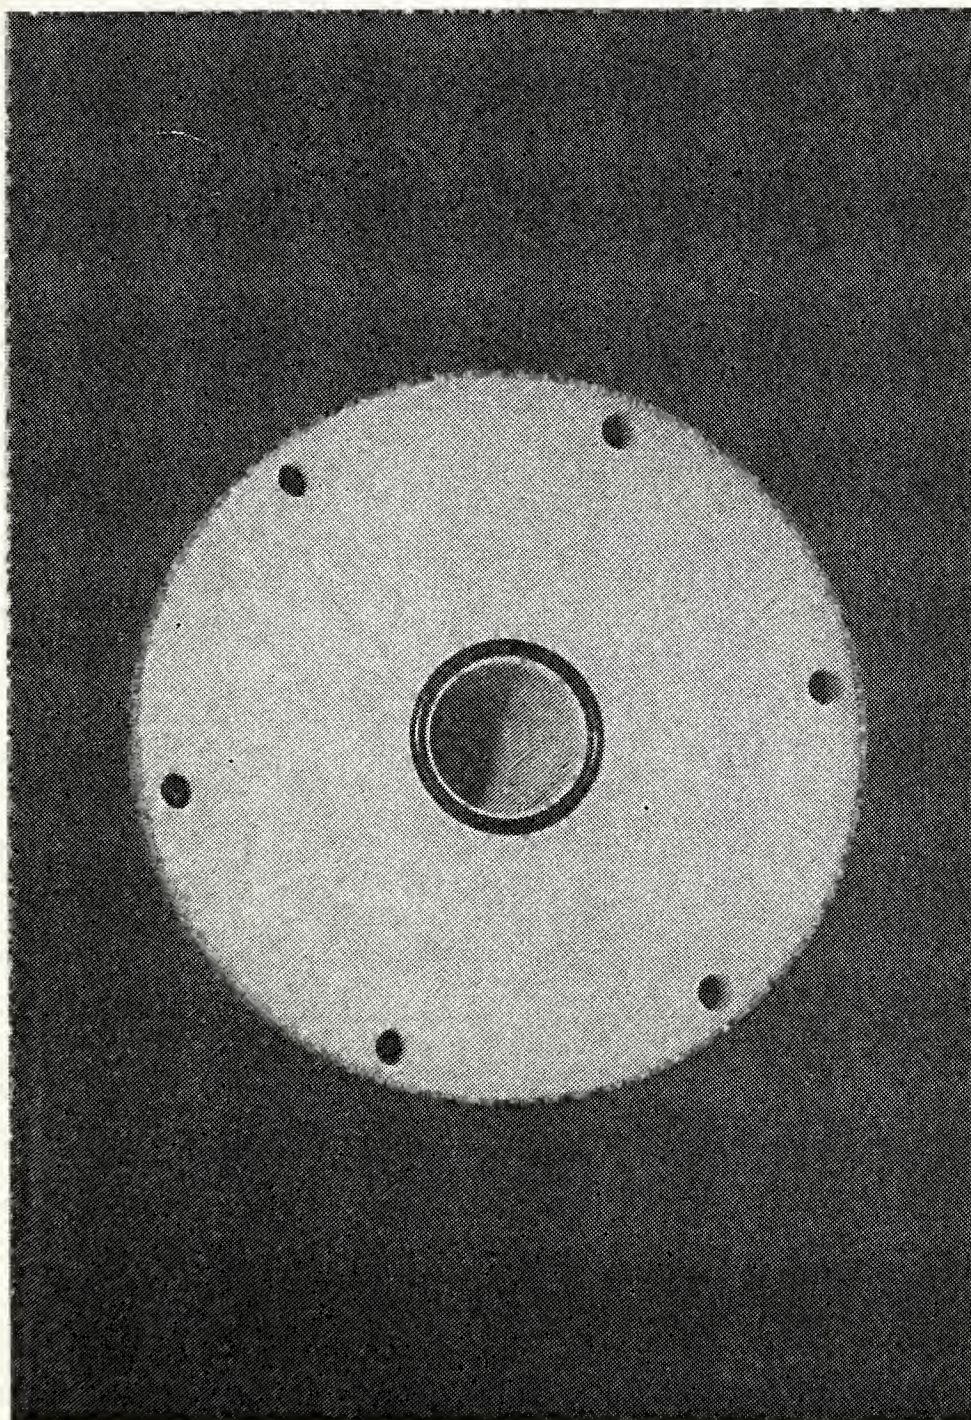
Photograph of "O"-ring Seal on Back of Front Chamber
